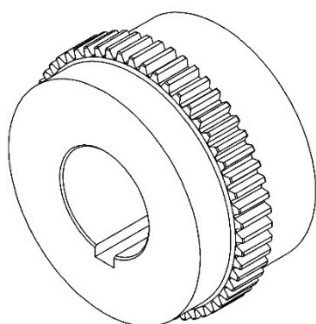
STEEL GEAR FLEX HUB (SHORT END)
